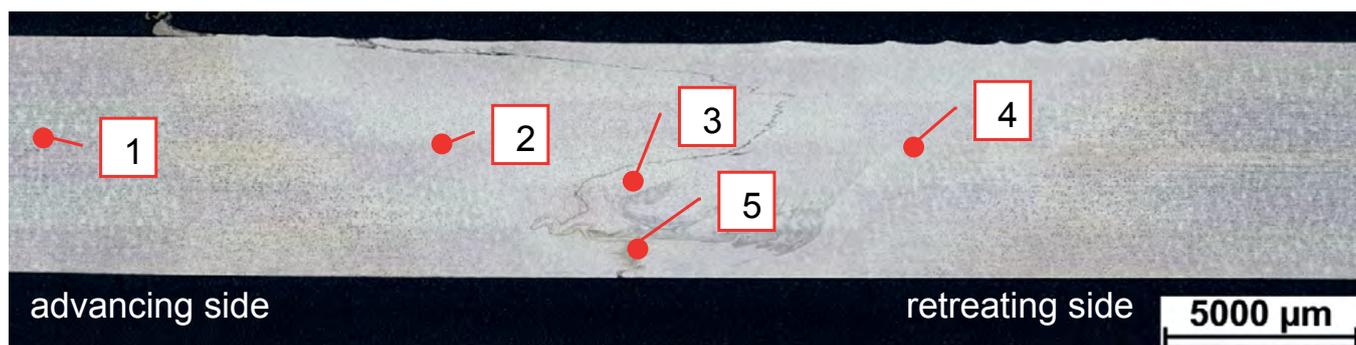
Main view of the macrostructure of the weld made of alloy EN AW-6082, with marked areas subjected to microscopic observations; welding parameters: tool rotation rate $V_n = 450$ rpm and welding rate $V_z = 450$ mm/min; mag. 50x
